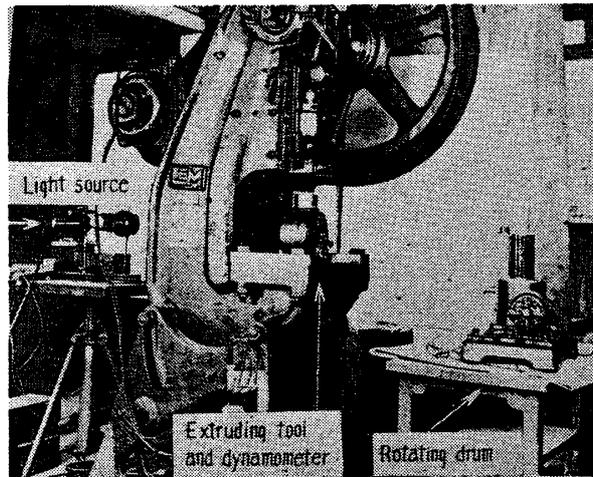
Photograph Showing Crank Press, Extruding Tool and Ring Dynamometer Used for Experiment.
